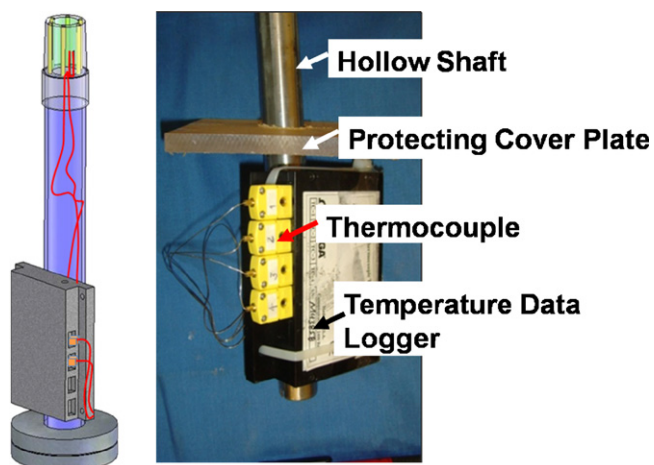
Arrangement showing connection between thermocouples, mandrel and datalogger.
